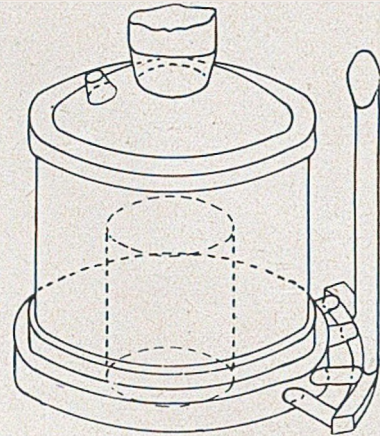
Sketch showing Running and Feeding Method for a Cylinder, using an Exothermic Sleeve; and FIG. 14, the Casting before removal of the Head.
